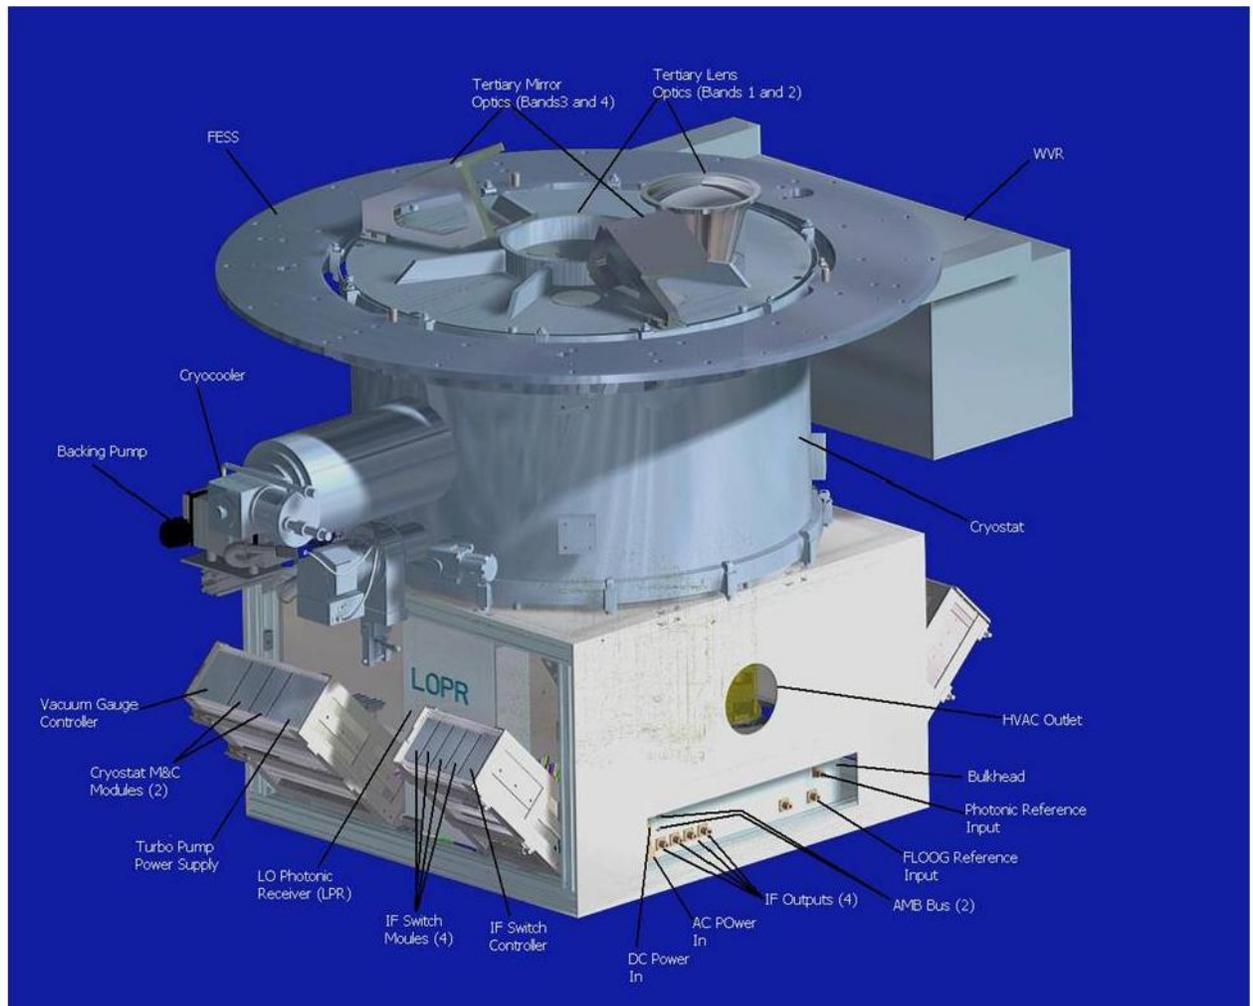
Side view of ALMA frontend showing cryostat assembly, with room temperature unit below.
